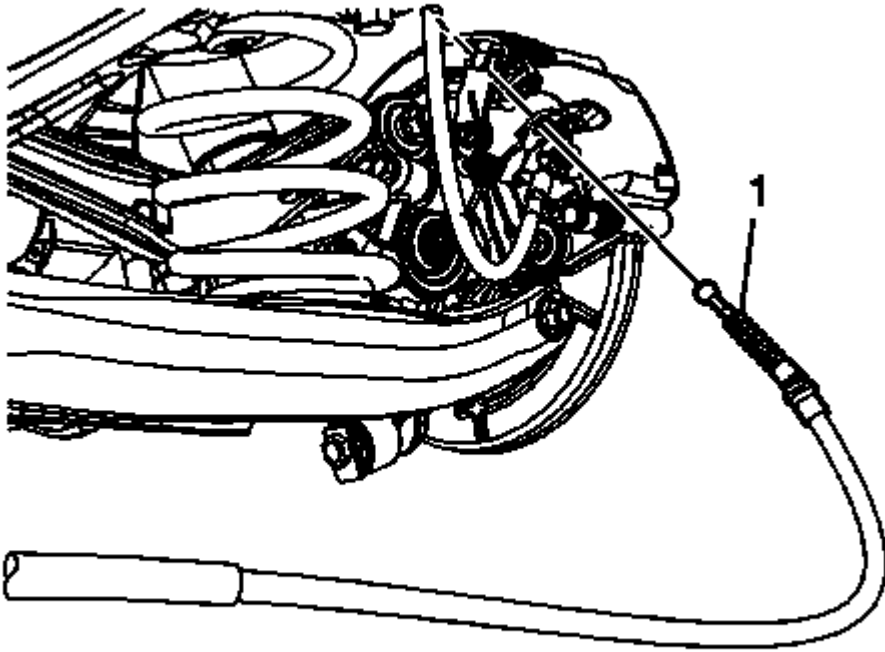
Rear Parking Brake Cable, Parking Brake Actuator Lever And Right Rear Brake Caliper
